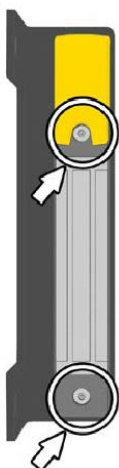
Attach the process guard locking to the mounting plate and tighten the Torx screws M6 x 25 mm.
